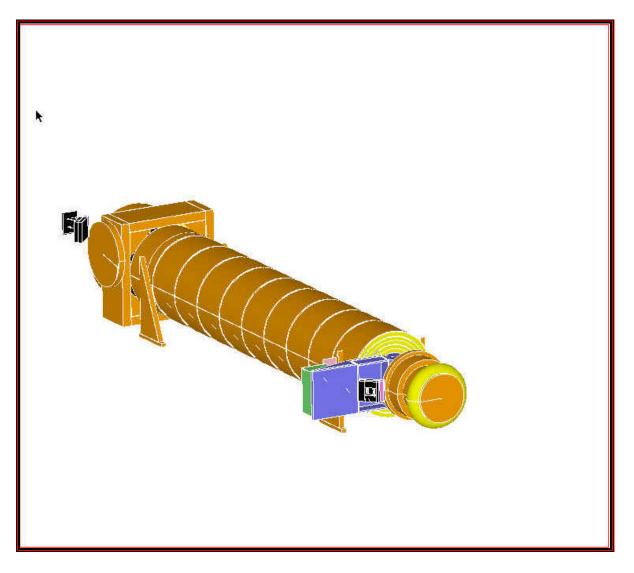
TSS Model Showing External Surfaces for AHEAD Deployed Boom
